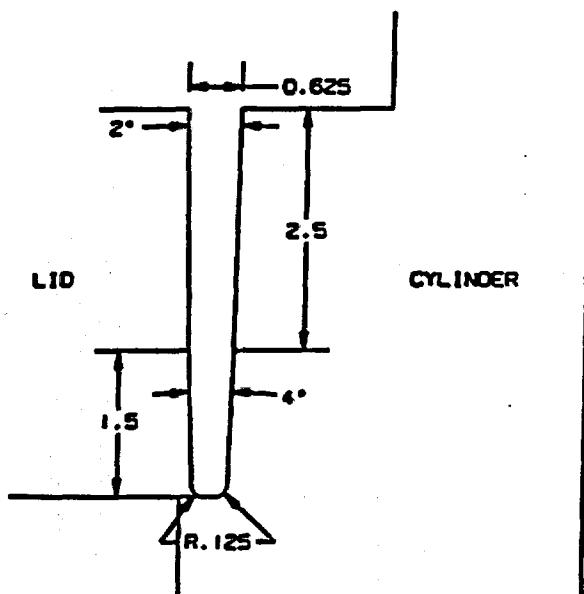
Outer Lid Narrow Groove Weld Joint Geometry
